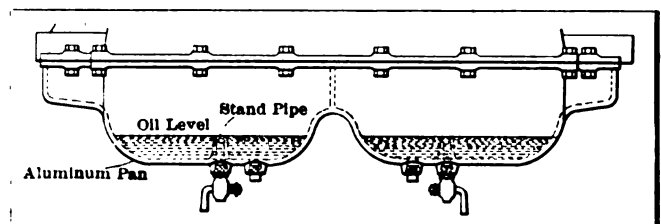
Showing how standpipes can be fitted to motors to drain off superfluous oil
